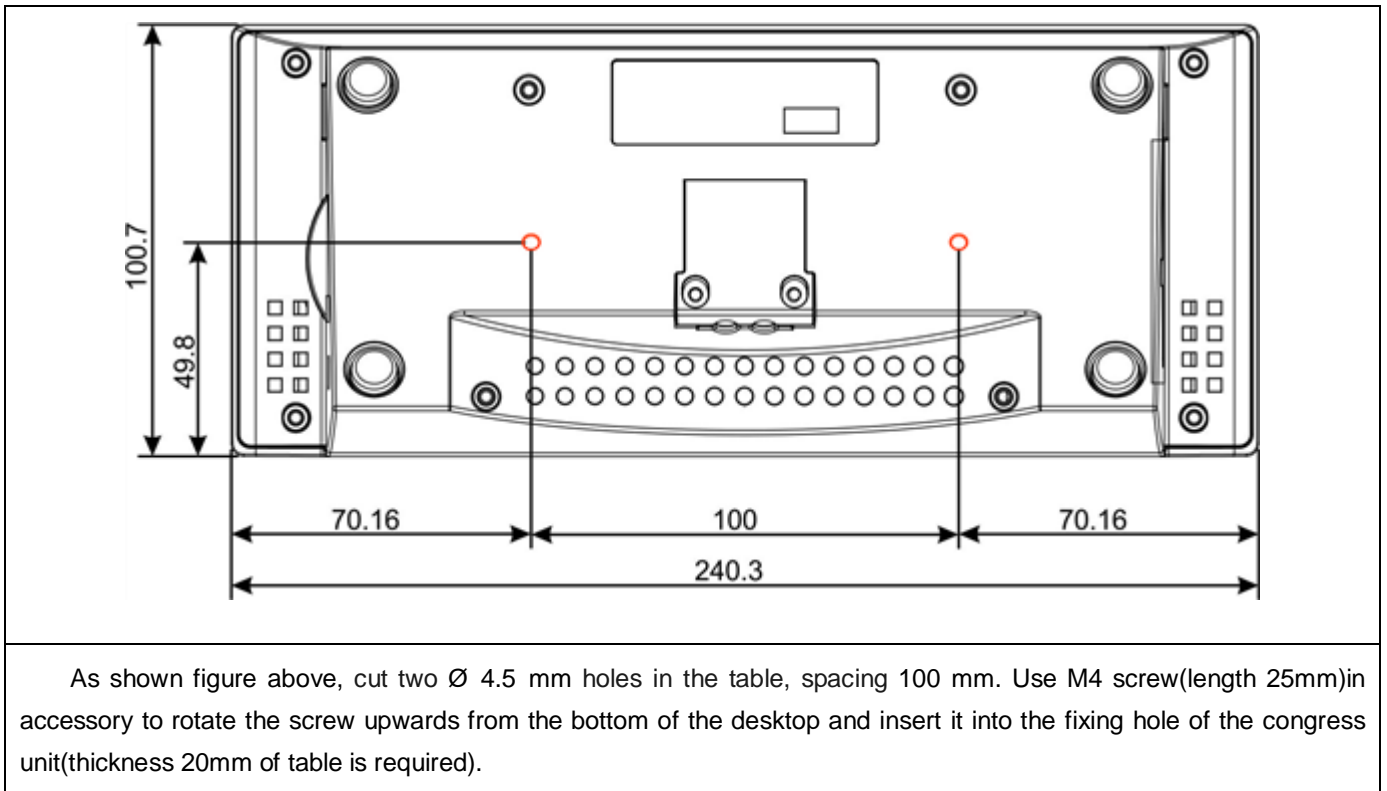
HCS-4890N/80 Bottom holes and size figure (unit:mm)
